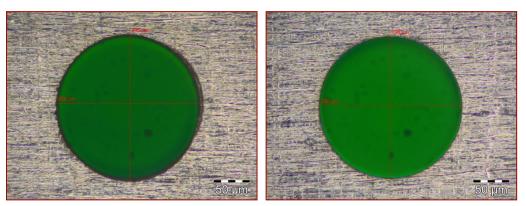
Visible image of hole machined in 250 µm stainless steel.
